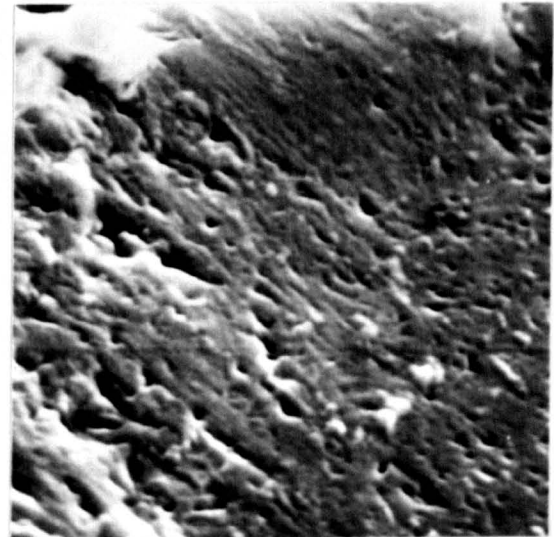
Scanning Electron Fractograph of a pre-pitted rotating-bending fatigue test-piece showing a flat on the fracture face. (Fatigue test at $\pm 300 \text{ MN m}^{-2}$ in air. Sample failed after 4000 stress cycles).
